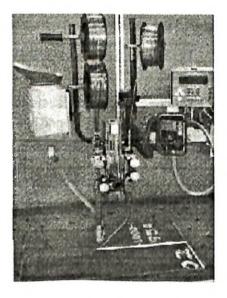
SAW twin wire set up with cold wire fed by a common electrical motor
